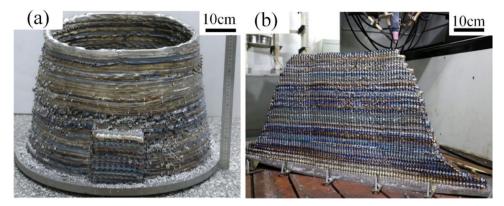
Large size components after defect control: (a) barrel shaped component (Sample-2, deposited sample), (b) frame shaped aircraft component (deposited sample)
